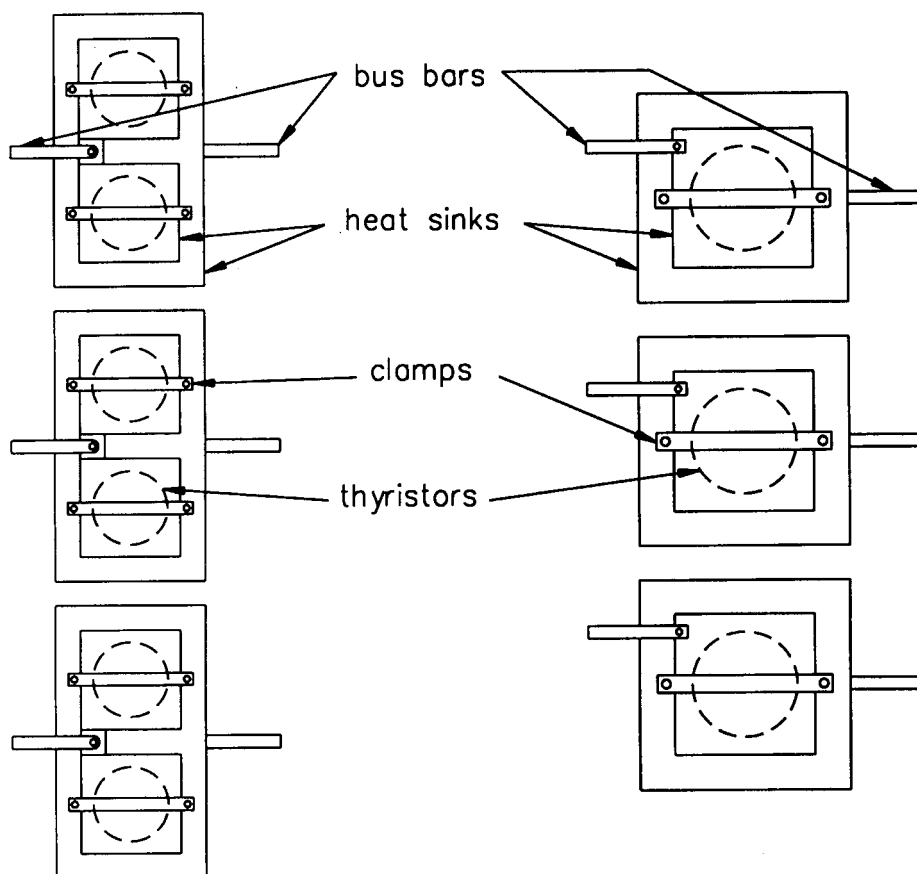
Comparison of three-phase soft starter assemblies using PCTs and BCTs. The left assembly is made of PCTs, and the right one is using BCTs. The BCT solution enables a reduction in the number of required mechanical parts and therefore in size.
